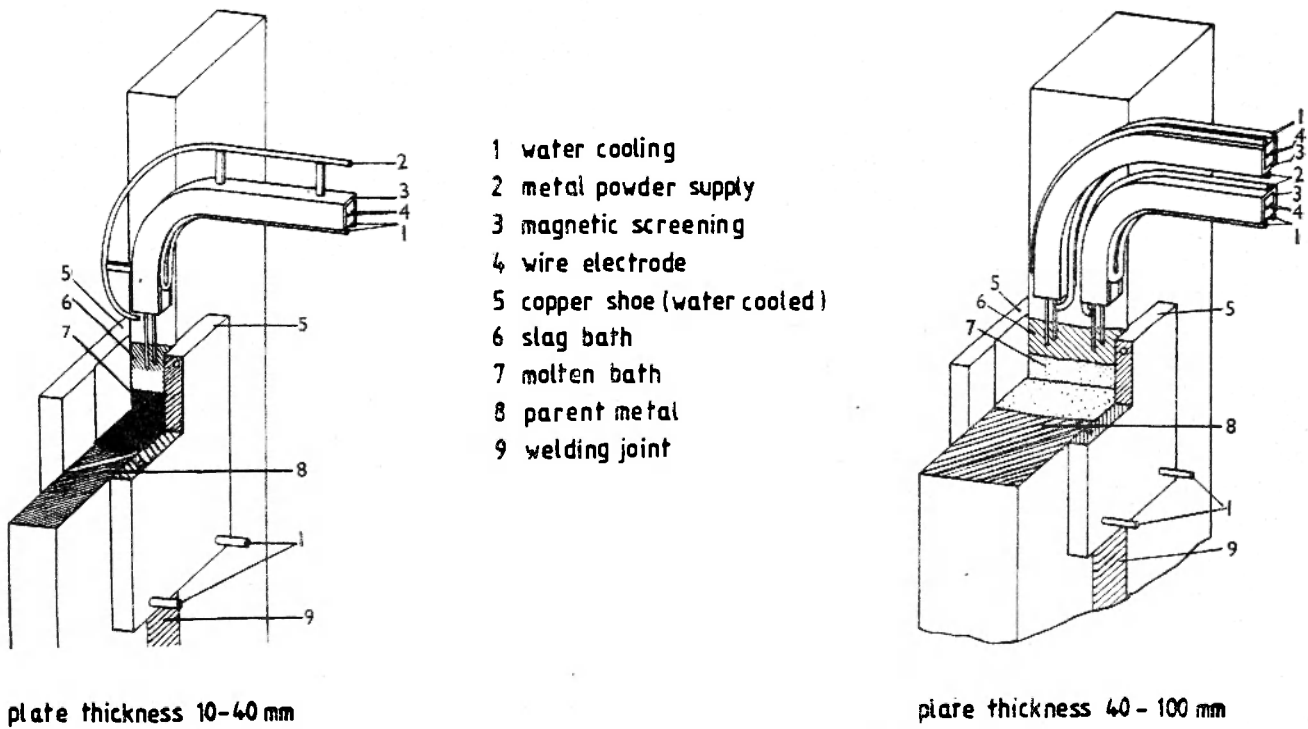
Procedures of electroslag high speed welding with powdered filler metal when preparing square-butt joints.
